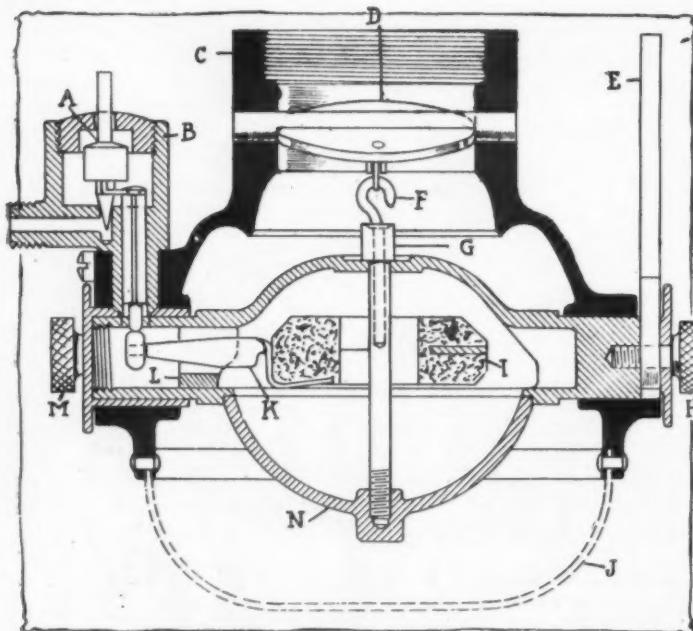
A B C carburetor contains six jets in rotating float-chamber
